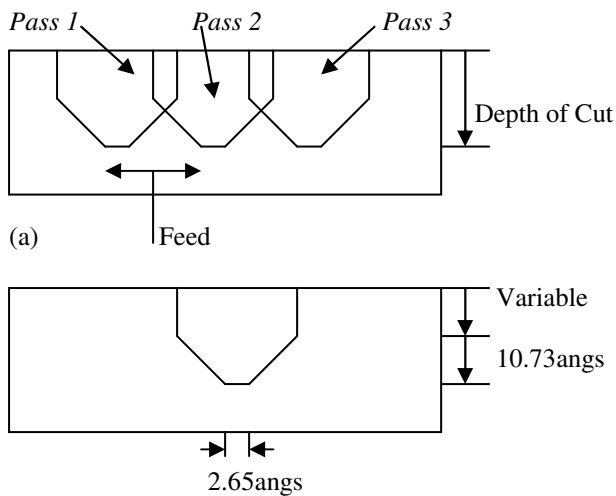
Cross Section of the Machined Grooves with Passes 1-3 (direction of cut is perpendicular to the paper face) 1b: Tool Tip Dimensions
